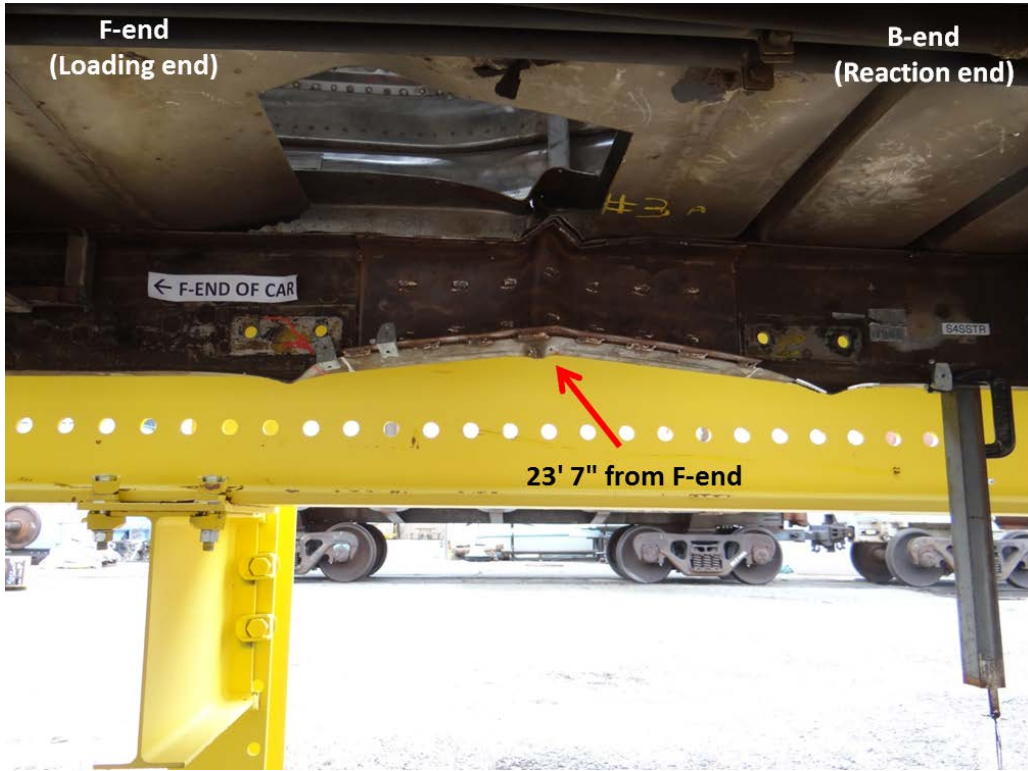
Post-test — Right Side Sill Buckle at Section 4 near Patch
